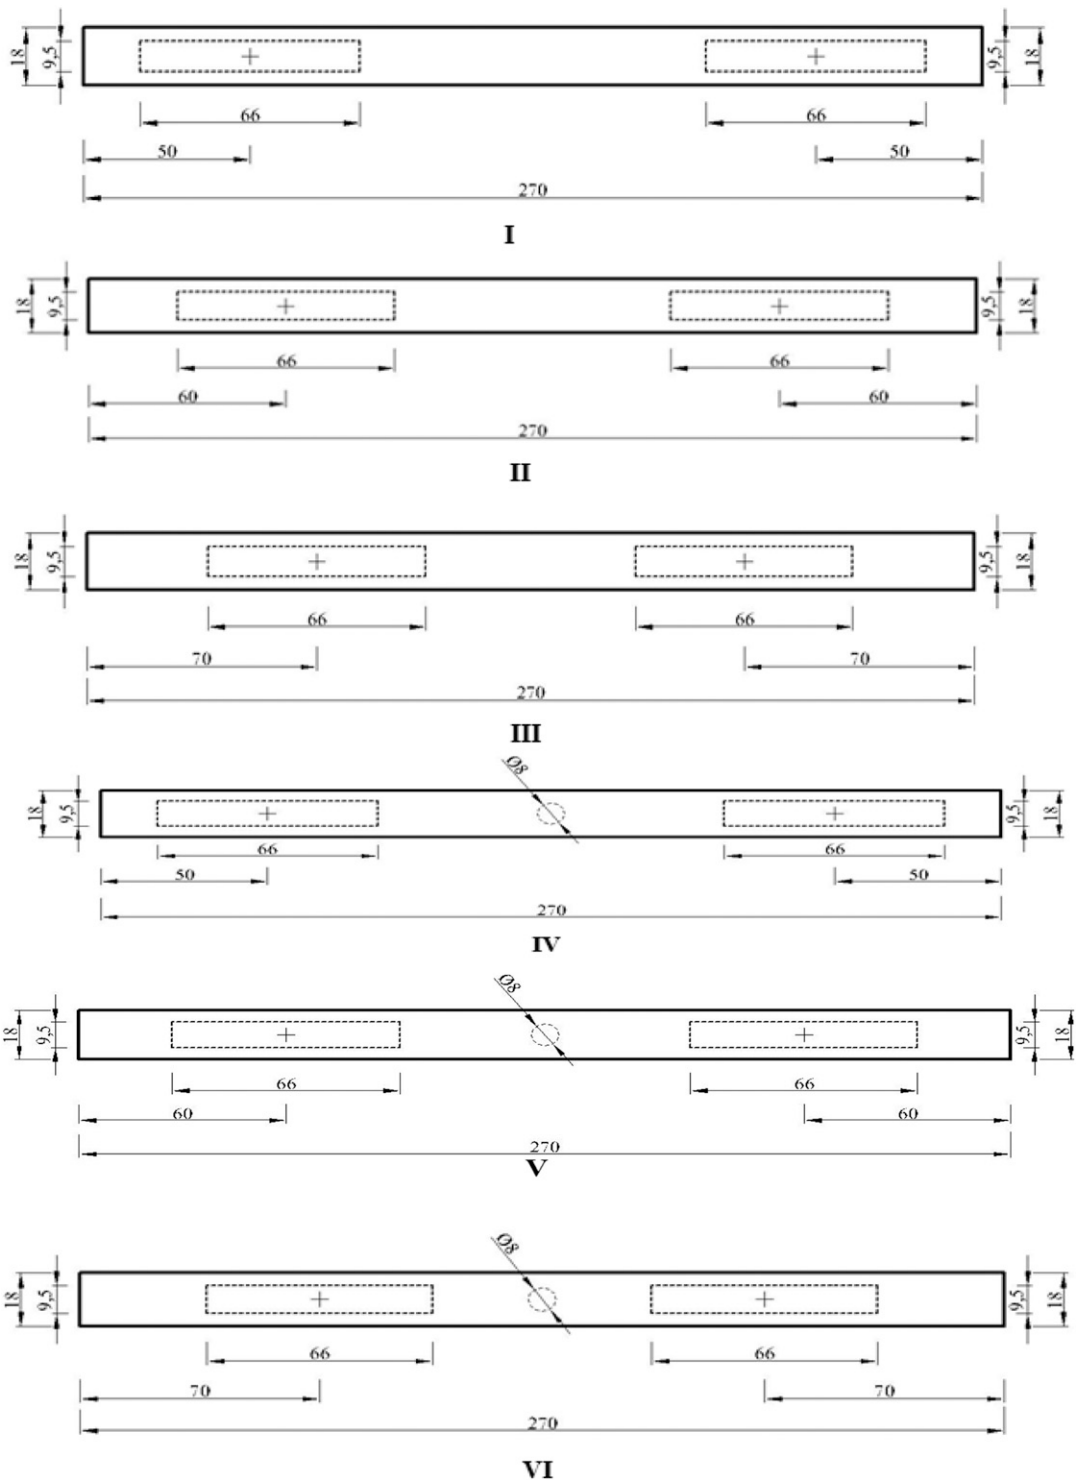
Grooves for catch connector (Clamex P14) and dowel holes on the test samples (dimensions in mm).
